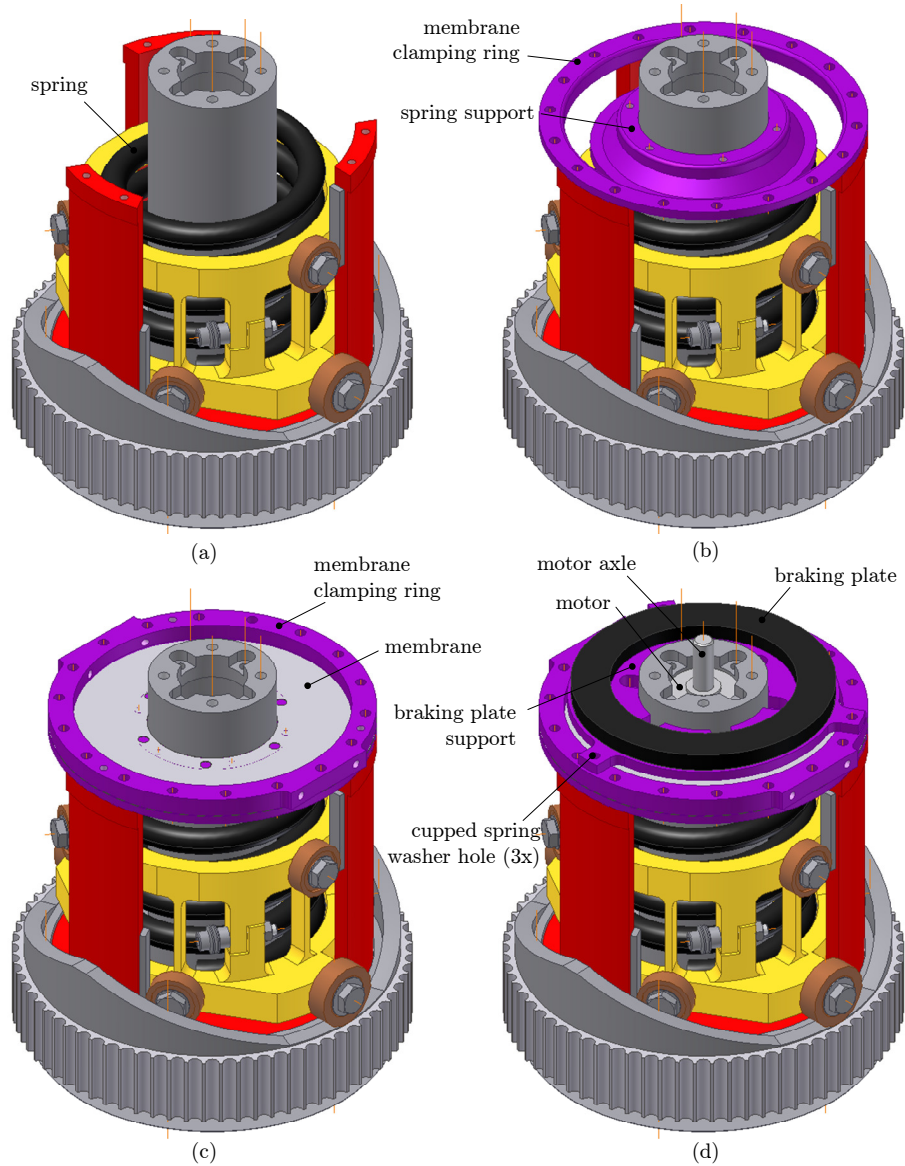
(a) A spring is put into the linear guidance. (b) A spring support is placed onto the spring. Furthermore, a membrane clamping ring is mounted onto the cylinder. (c) A membrane with another clamping ring is placed onto the first clamping ring which are bolted (not shown in figure) to the cylinder. (d) The braking plate is mounted onto the membrane via the braking plate support. The clutch gap can be adjusted with 3 cupped spring washers mounted into the cupped spring washer holes. The motor is mounted into the axle.
